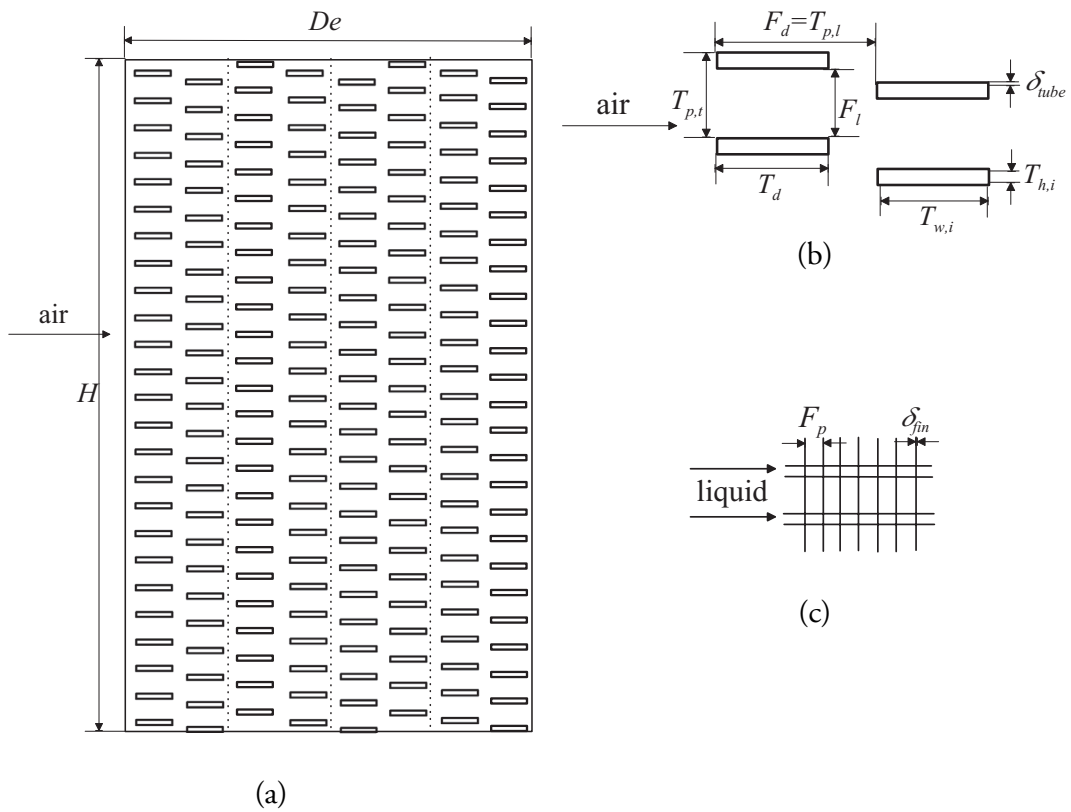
Schematic drawing and nomenclature of the “flat-fin-core” heat exchanger denoted FFC (Paper IV); (a) side view of cross-section, (b) enlargement of cross-section of staggered tube layout, (c) plate fin geometry, (c)
